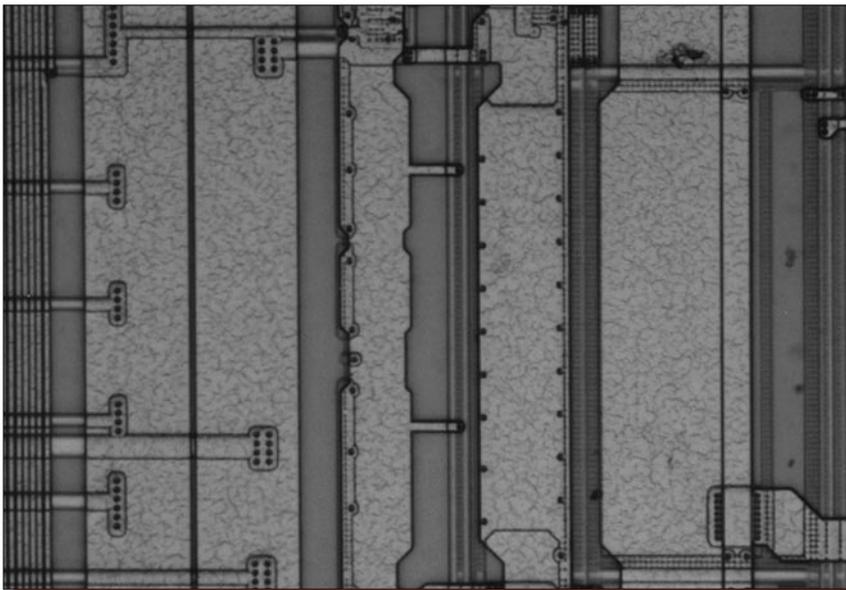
Optical view of marking on the die surface. Mag. 400x.
